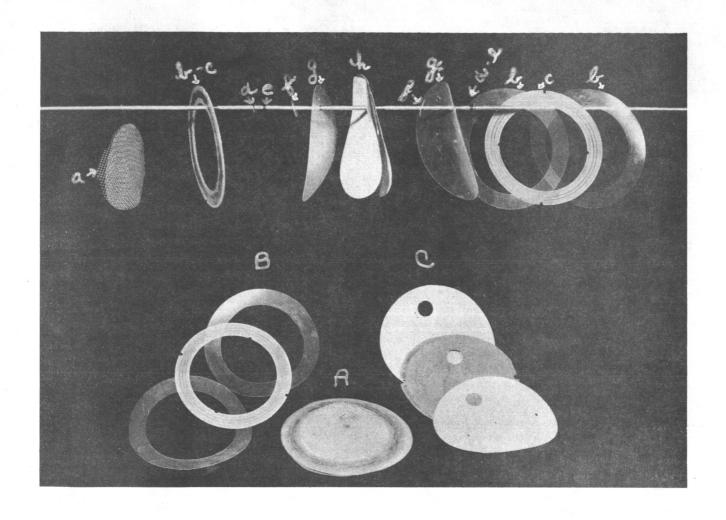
REVERSE OSMOSIS ASSEMBLY, OPEN
